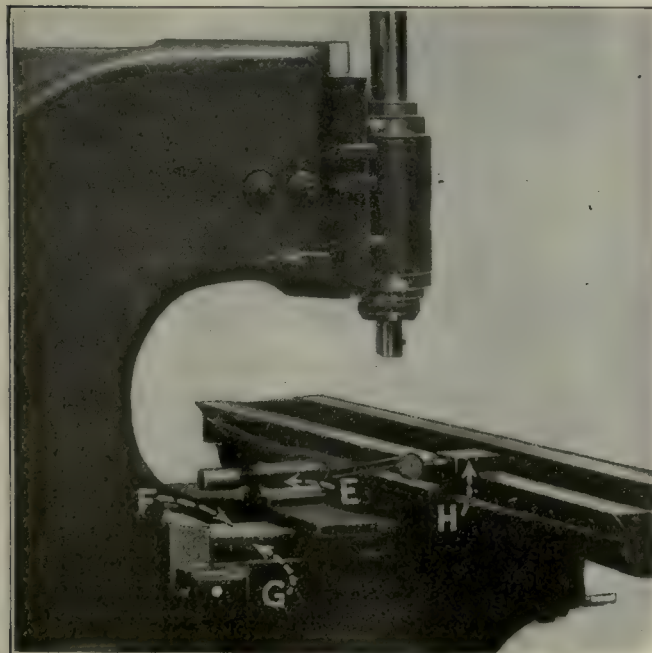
TESTING ACCURACY OF KNEE AND SADDLE BEARINGS
